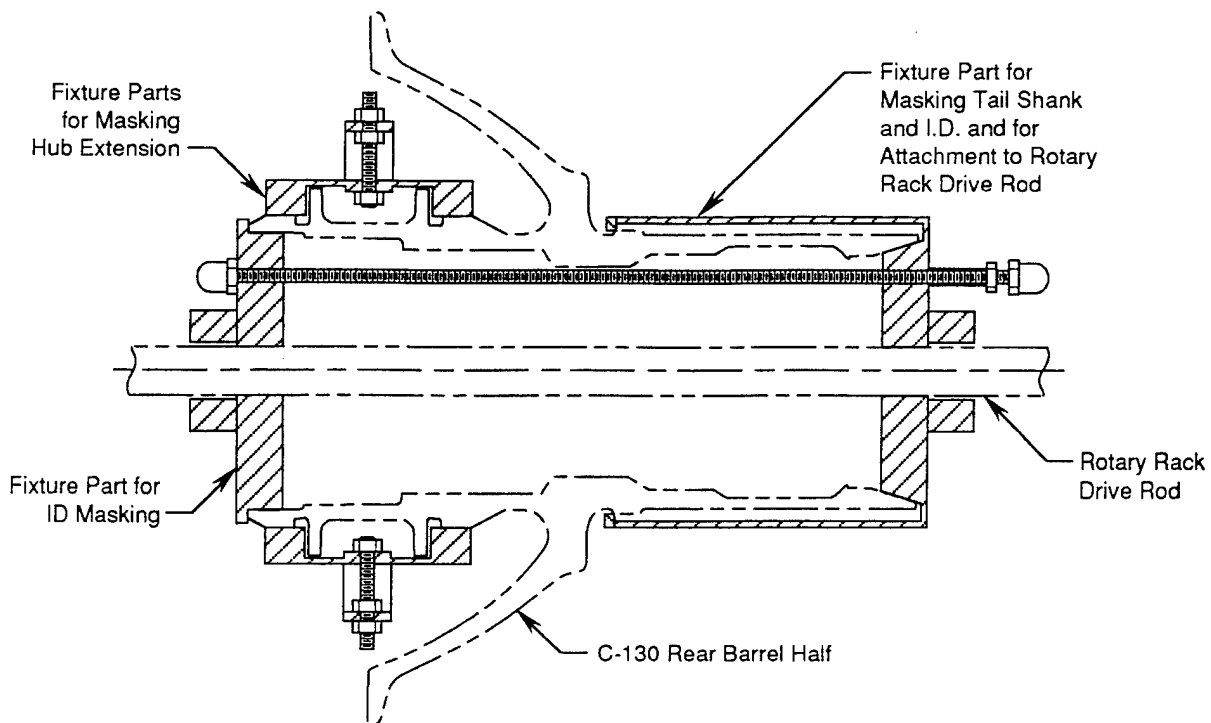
Fixture/C-130 Propeller Rear Barrel Half Installed on the Rotary Rack.
